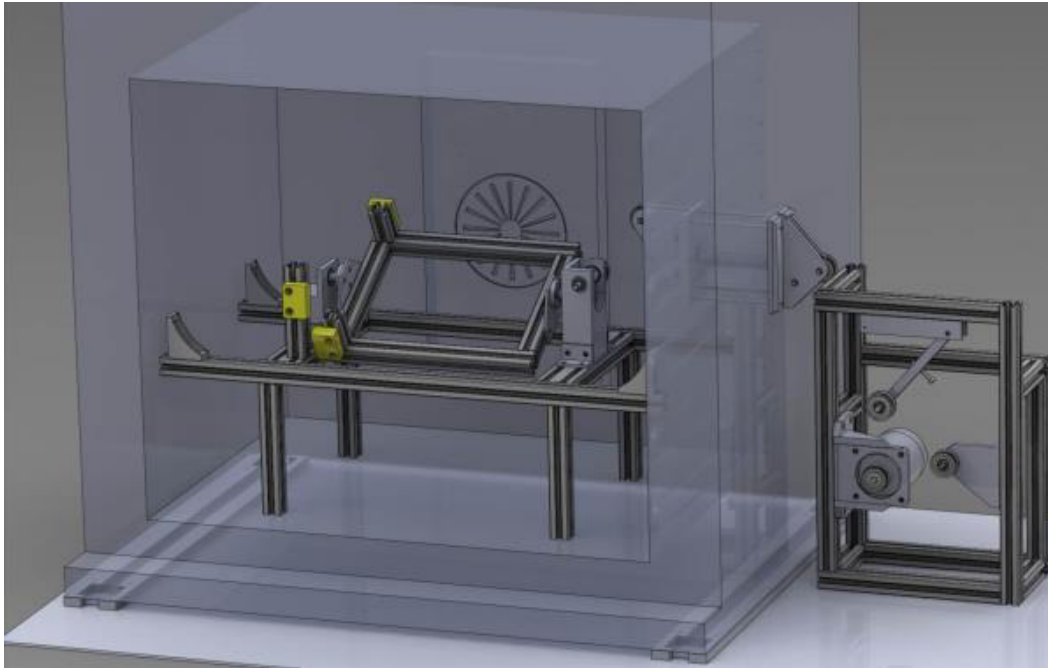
Construction photograph of the turning device mounted inside an air circulation oven and driven by an electromotor with stepping gear system.
